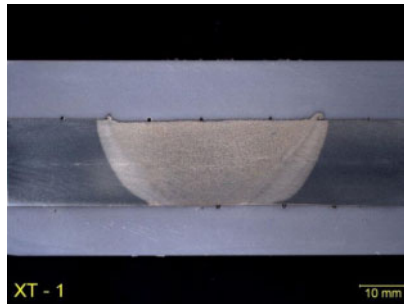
Cross Section of FSW weld in 0.75-in thick X-70 Steel
